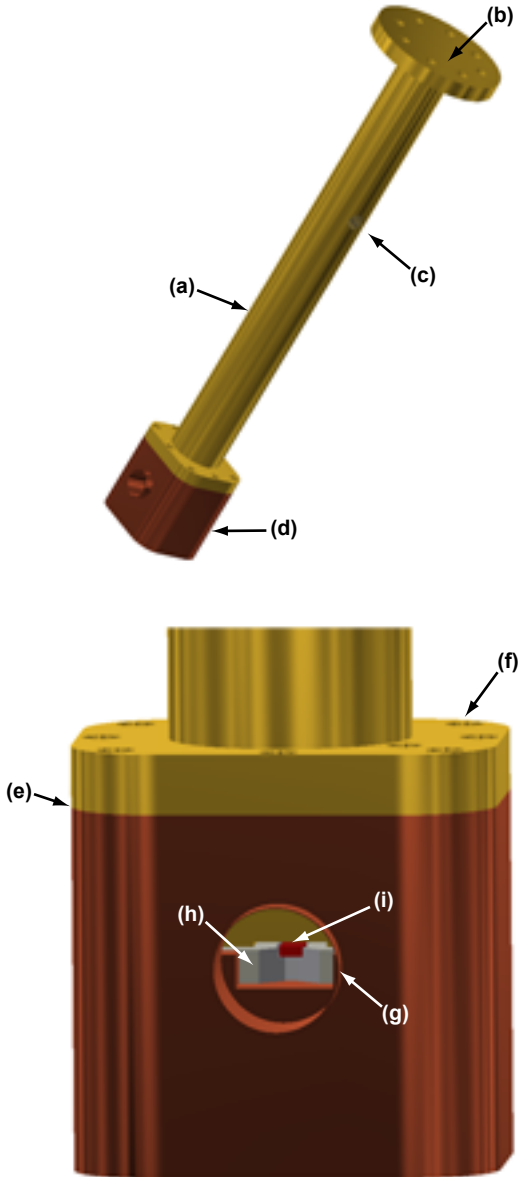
(top) CAD drawing of the fully assembled sample rod. (bottom) Close-up view of the sample chamber. For details, see main text.
